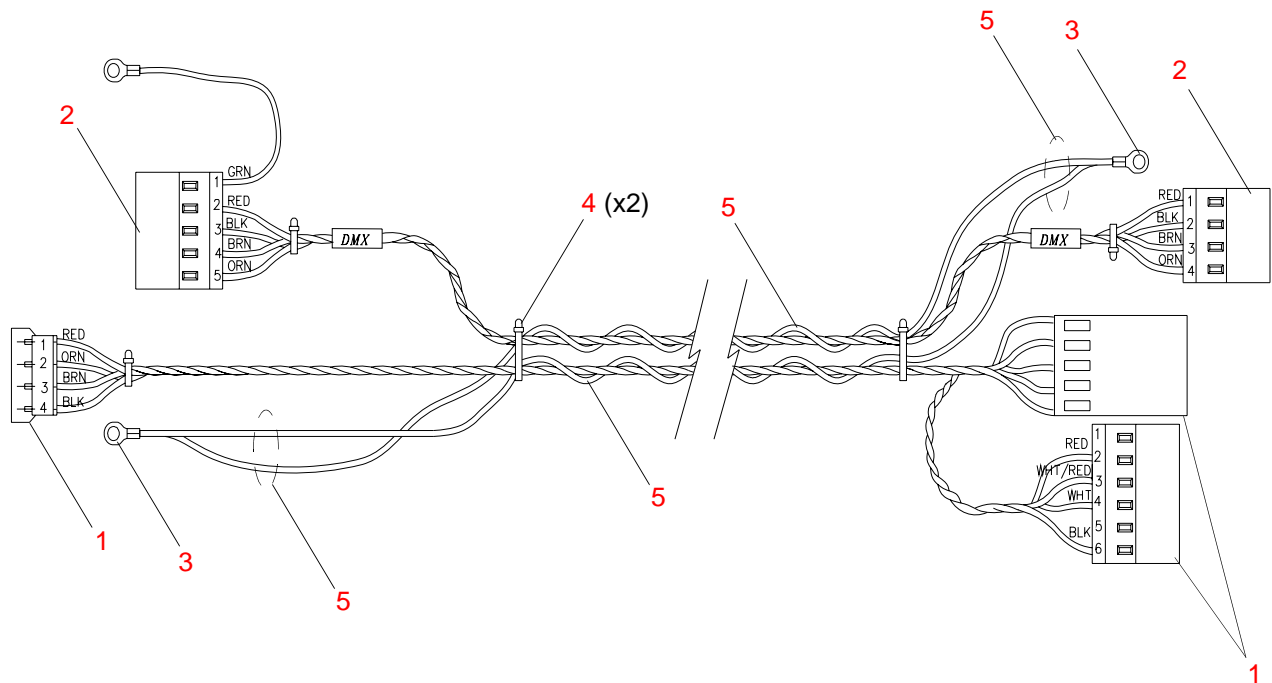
Arc Yoke Lamp Cable Assembly (VL500A)
